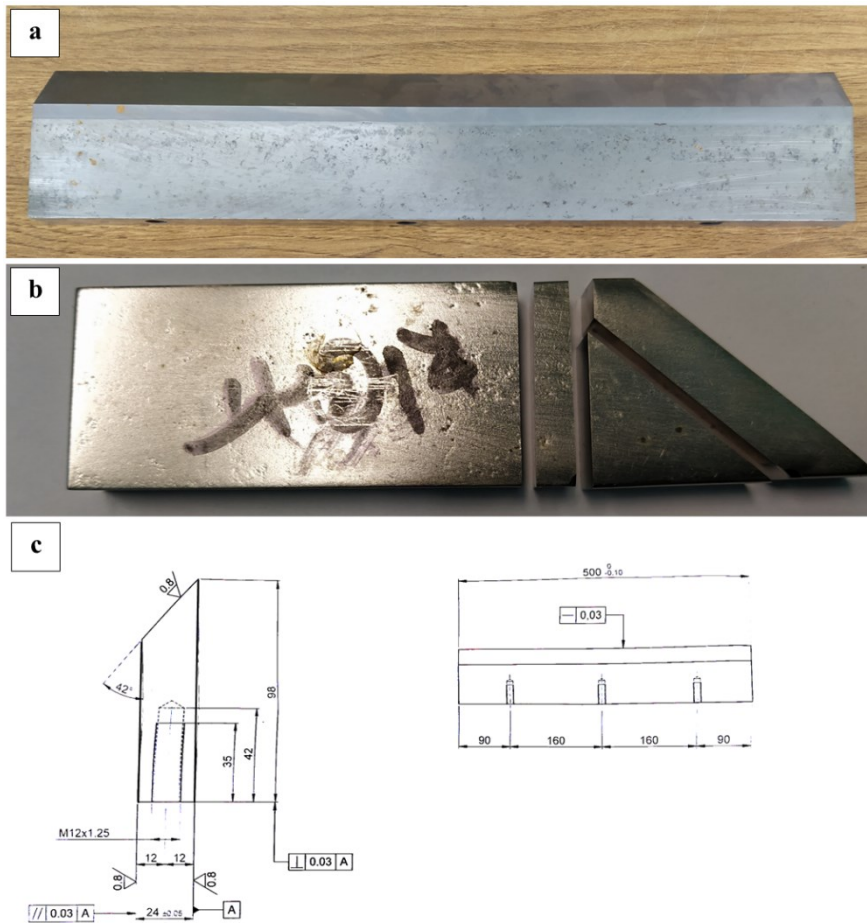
Received worn industrial blade: a) picture of received blade, b) sliced blade for material investigation, and c) technical drawing of as produced blade.
